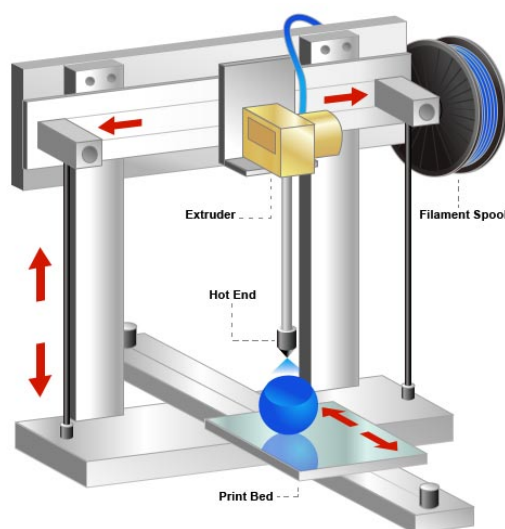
3D printer's components. Generally, a 3D printer has three key parts: the extruder tool head (including thermocouples and a motor), the nozzle and print bed [219]. Reprinted from Anatomy of a 3D printed © 3D printer power, <http://3dprinterpower.com/3d-printer-anatomy/>
